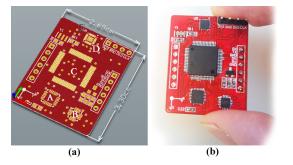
(a) PCB of AHRS and (b) Appearance of fabricated AHRS (Own pictures).
